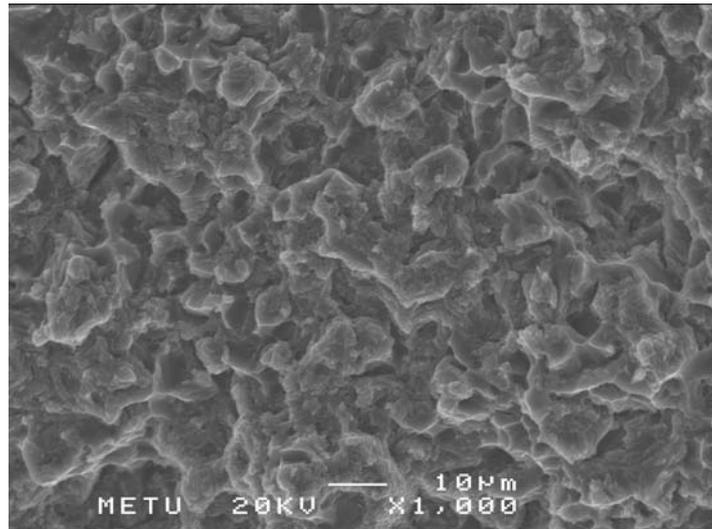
Fracture surface of AlSi10Mg0.8 alloy squeeze cast at 800 °C
